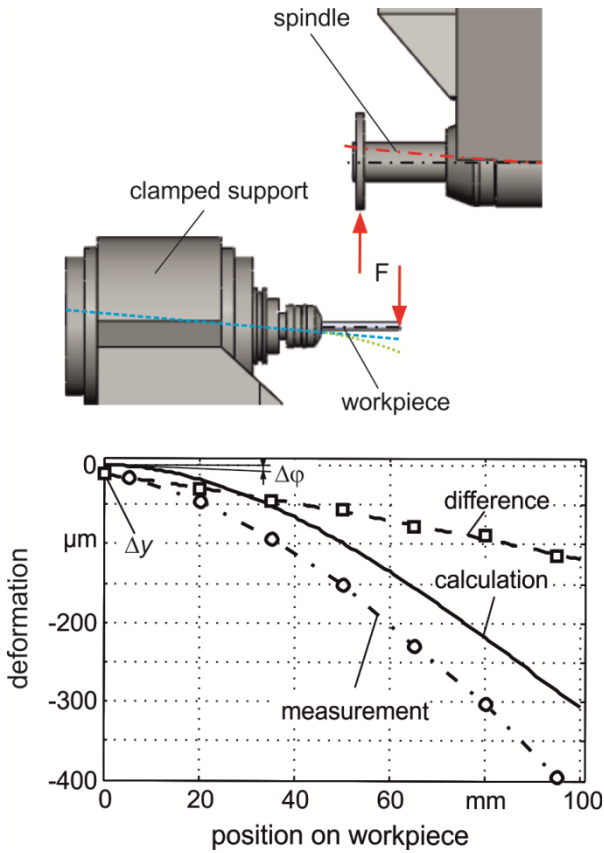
Measured deformation of workpiece and machine table for a constant load of $F = 100$ N
